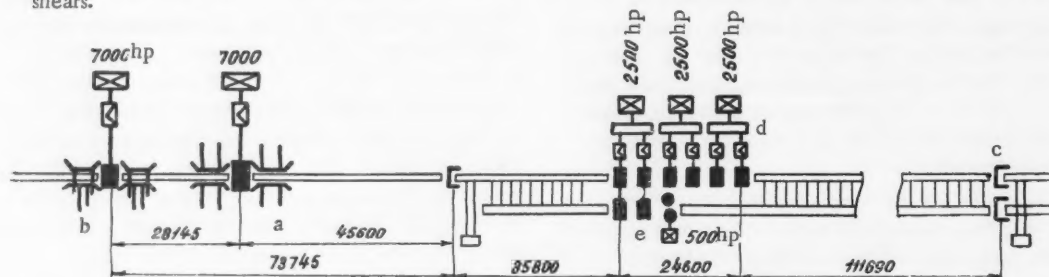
Layout of equipment at blooming mill No. 3: a) 1150 reversing stand; b) additional 1100 reversing stand; c) shears; d) 720 continuous billet mill; e) group of slabbing stands.
